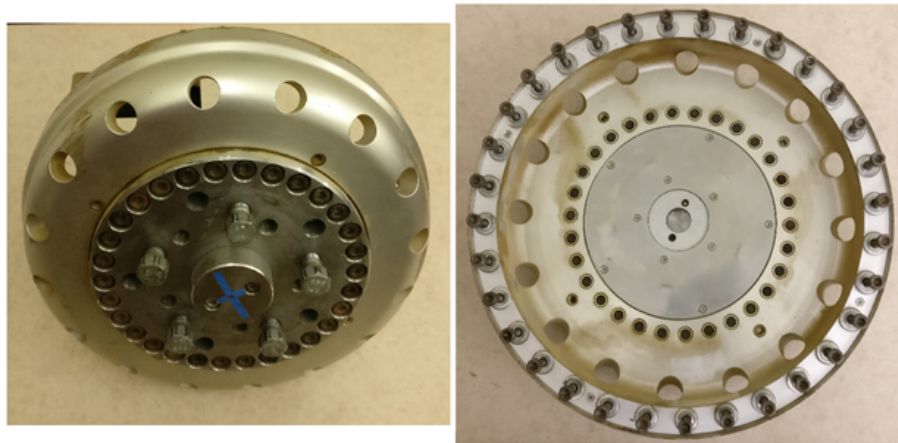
Disassembled *Kistler* system – Universal adapter
